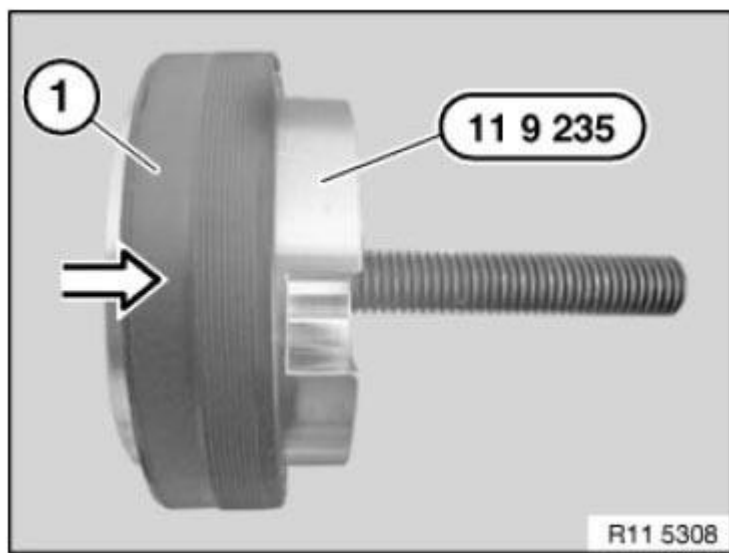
Pushing Radial Shaft Seal 11 9 235 Carefully On Special Tool
